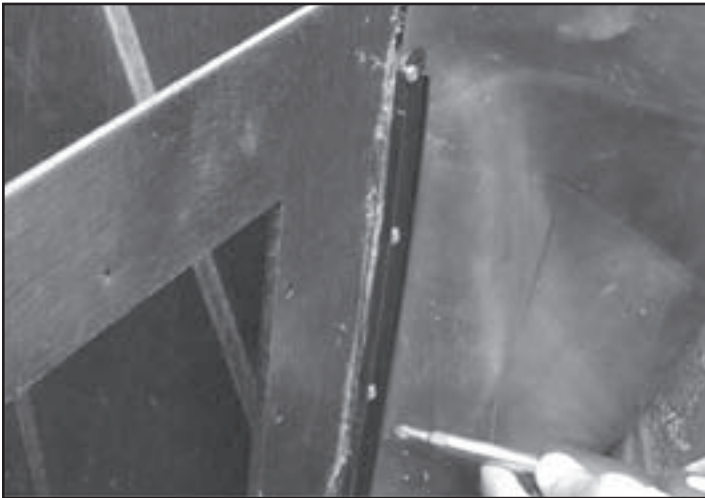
Tighten the screws squishing out the silicone along the edge of "U frame.
